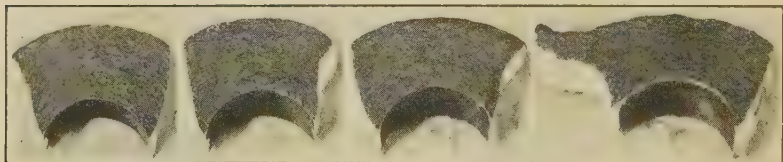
Test No. 6, showing pieces pulled out of modified T-bars during tension tests.
